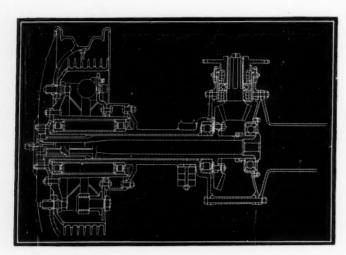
Portion of rear axles showing built-up construction. The roller bearings shown, and others in the car, were designed specially to withstand the tremendous centrifugal forces involved
